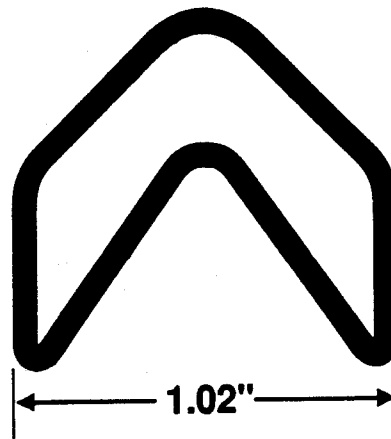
600 gr/ft Cu SHEATH, RDX EXPLOSIVE LSC
